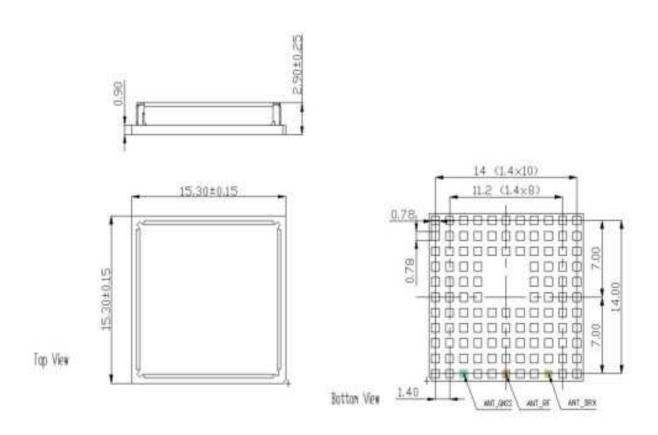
Dimensions of TX62-W (all dimensions in mm)
